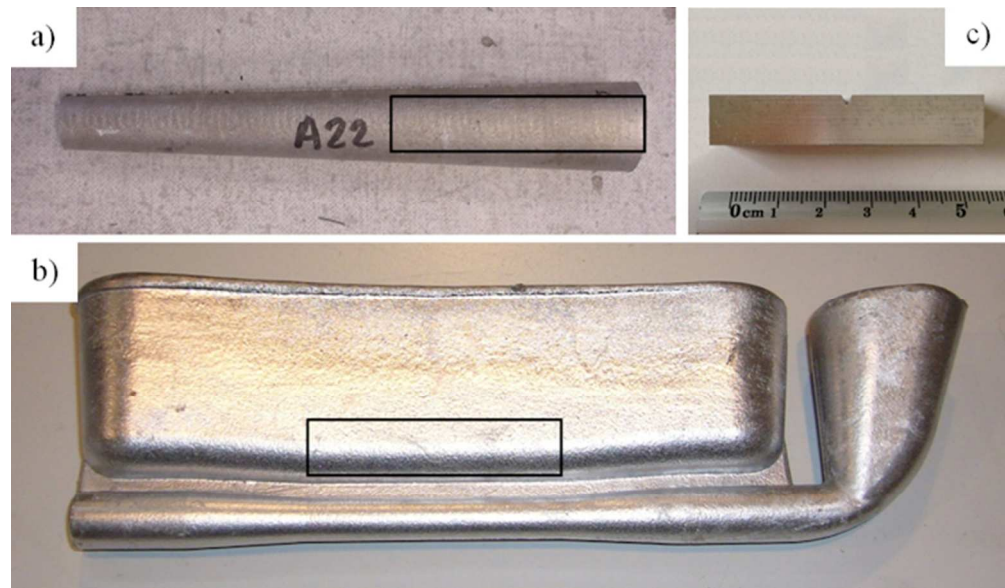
Castings obtained from: a) sand mould; b) permanent mould. The black rectangles mark the areas from where the Charpy specimens c) were machined.
